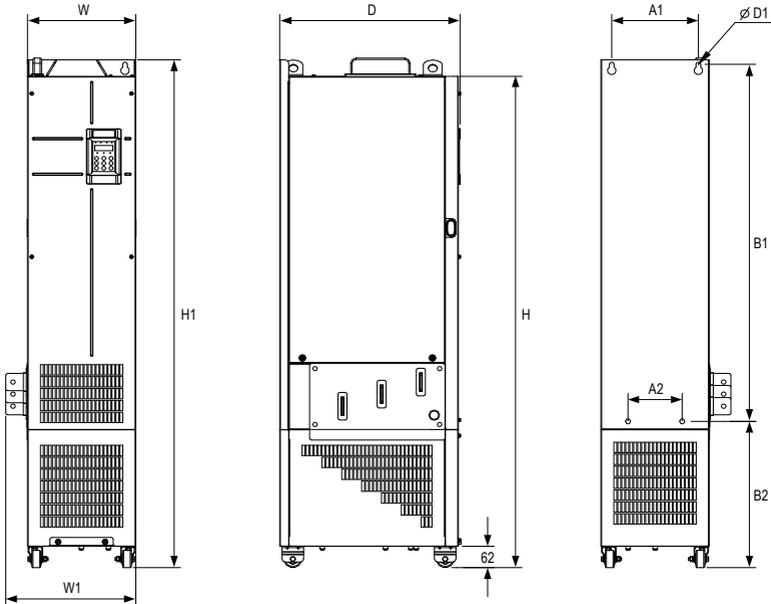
Overall and mounting dimensions of MD290T200G-L to MD290T450G-L and MD290T220P-L to MD290T500P-L
